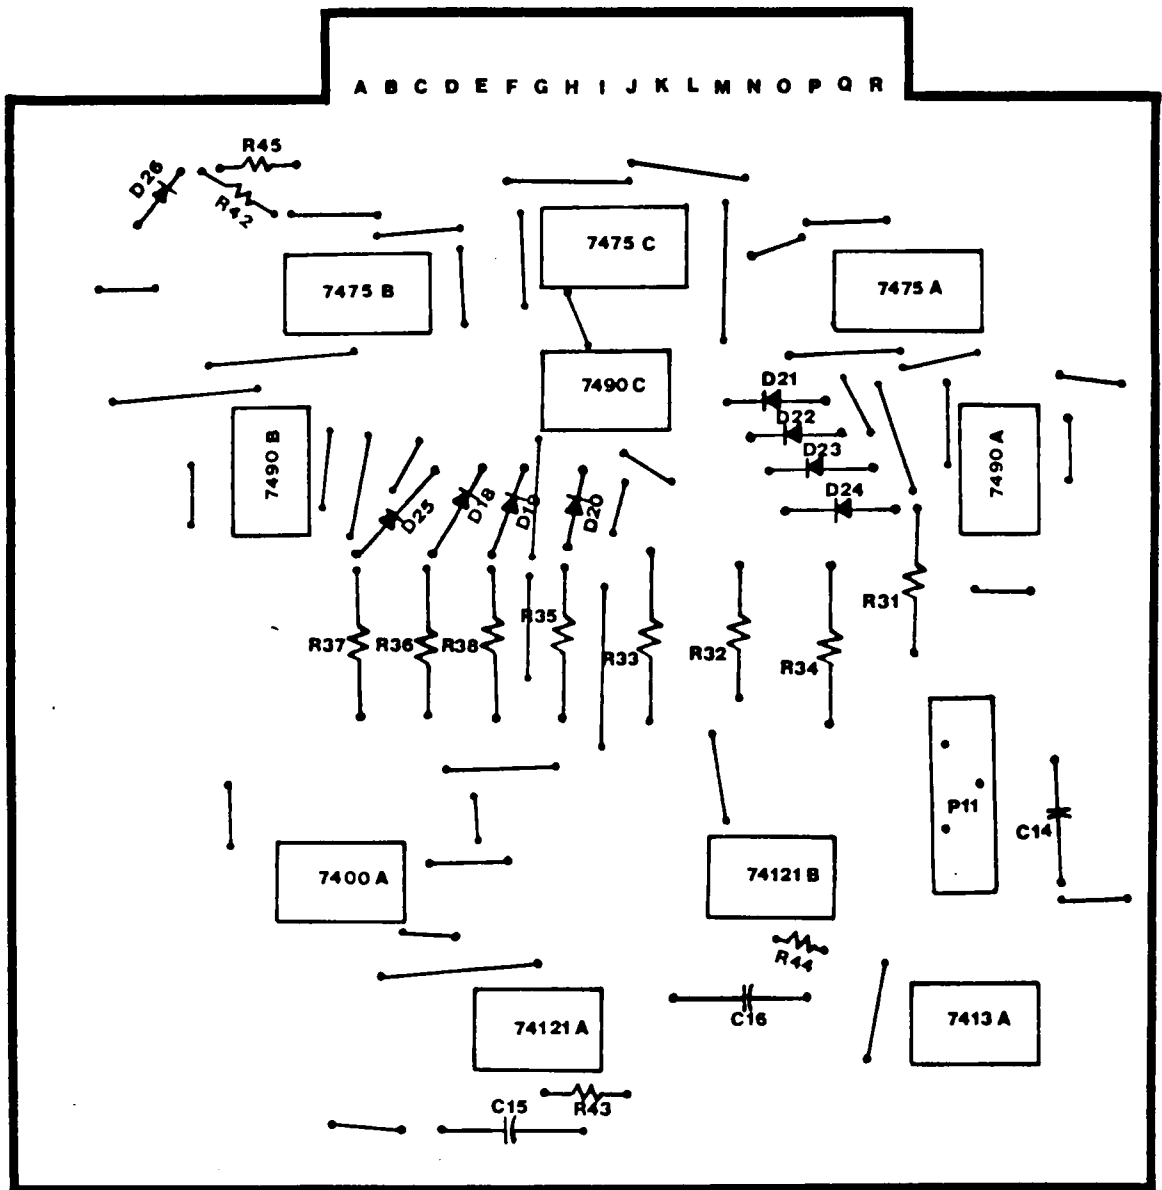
COMPONENT SIDE OF A/D BOARD
